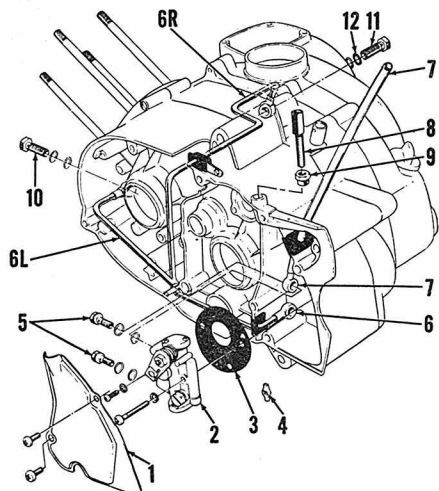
View of the engine oil injection system. Top end of the inlet oil line (7) connects to the oil tank filter. Gaskets are used on both sides of all banjo fittings; however, "O" ring (12) is also used at check valve (11).
